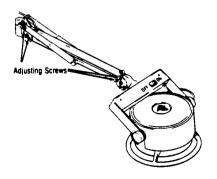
COUNTERBALANCE ADJUSTMENT.
